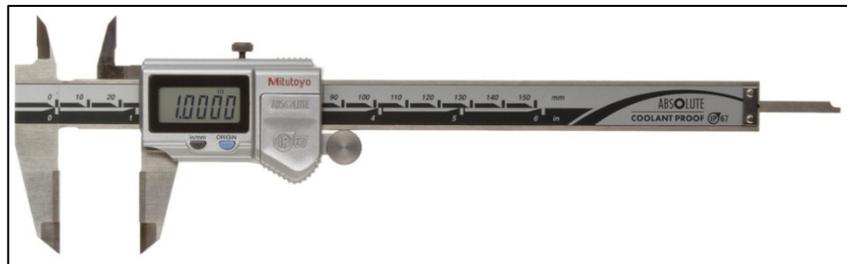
Absolute Coolant Proof caliper Series 500 [52].
